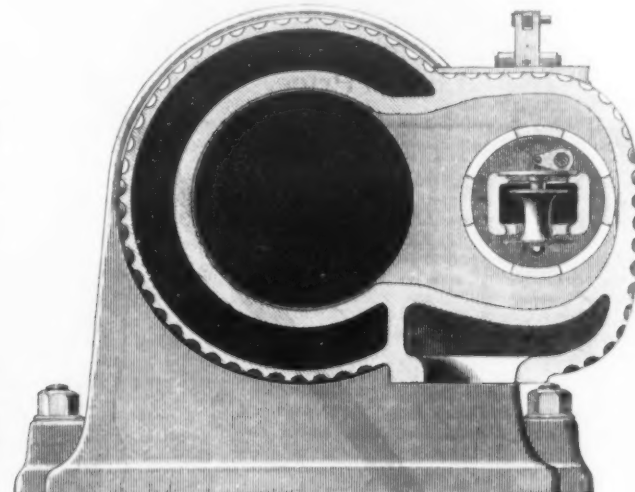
Cross-Section of Cylinder and Valve-Chest.
